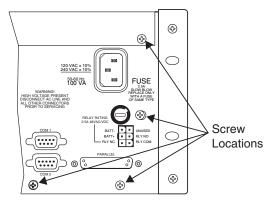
CPU, PS, User Interface Assembly Retaining Screw Locations
